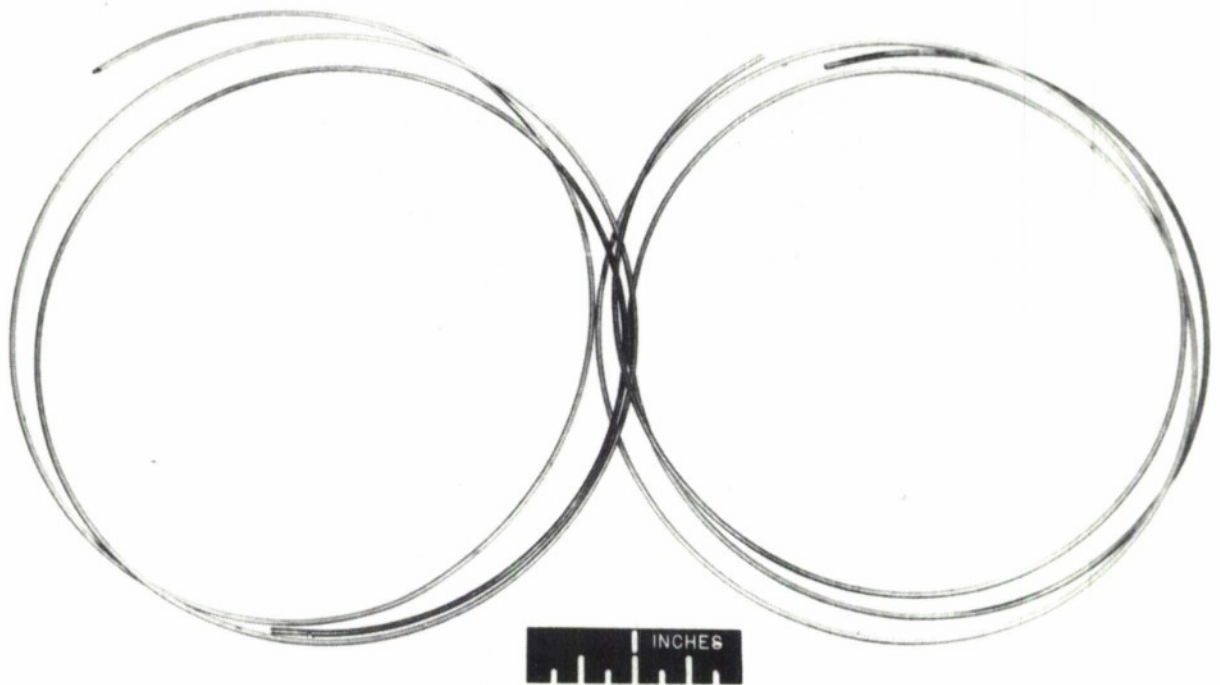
Y-98540 Photo of 1/16-in. Wire Produced by Swaging of Al-Si-Y Alloy No. 18 from a Casting
